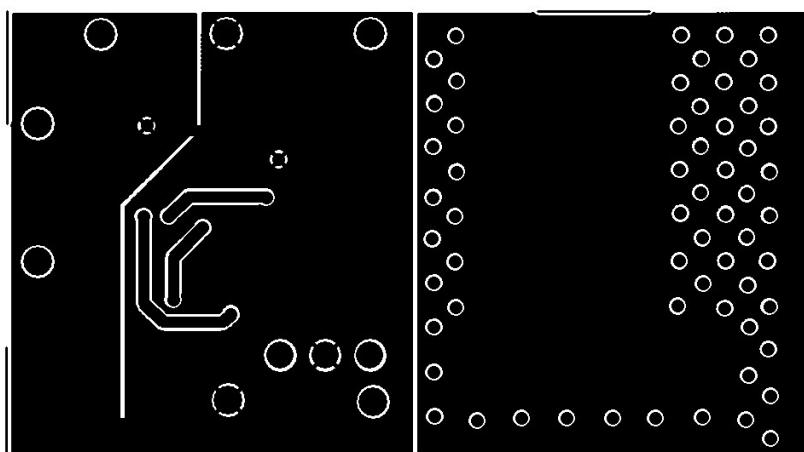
SP6134HVLEDEB PC LAYOUT BOTTOM SIDE
